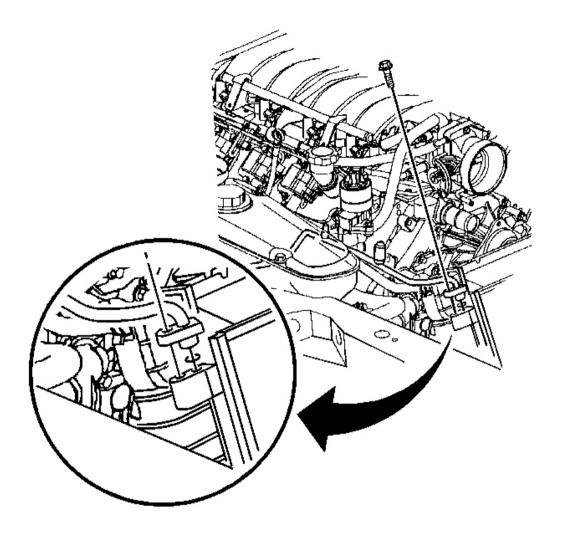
Front Evaporator Tube & Condenser Bolt Courtesy of GENERAL MOTORS CORP.
